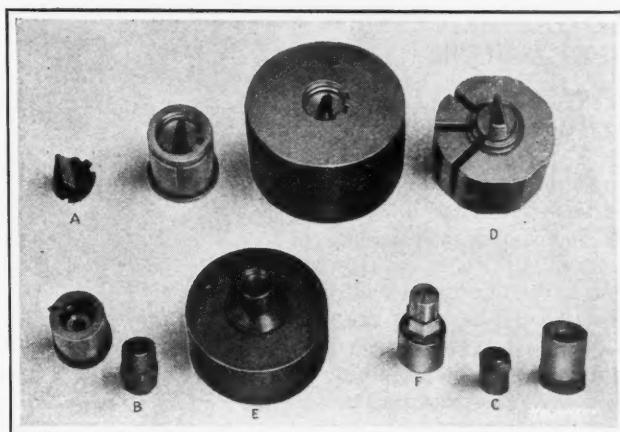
Examples of Bakelite Products, Molding Dies and "Coining" Punches used in Sinking Dies
